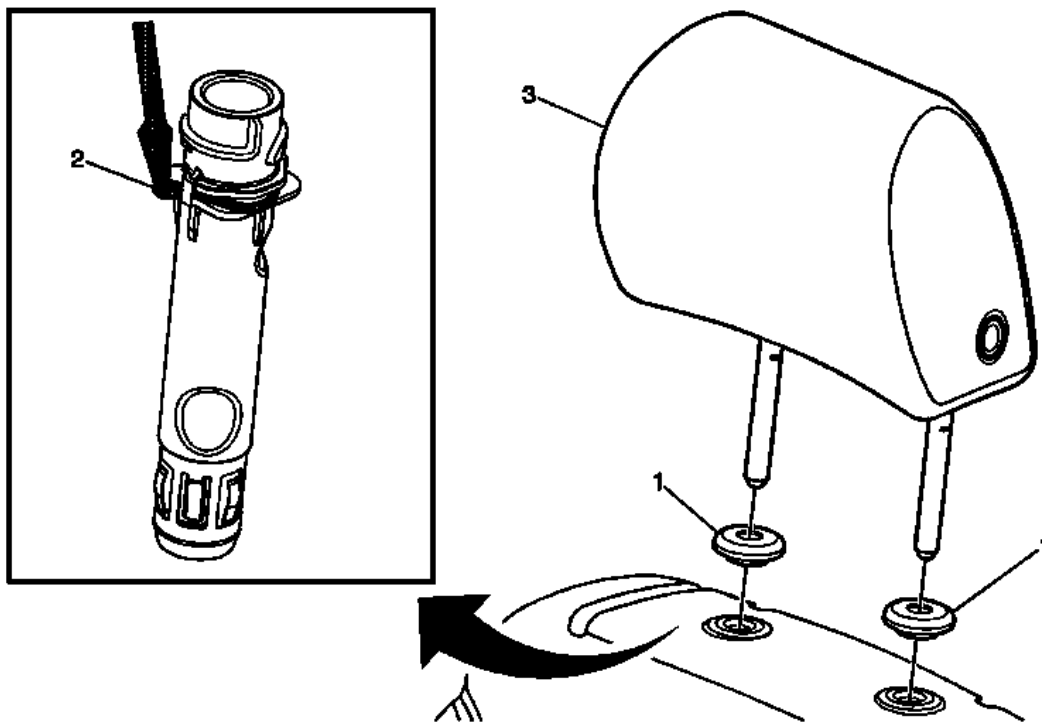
View Of Driver Or Passenger Seat Head Restraint, Clips & Bezels (Without AHS)
